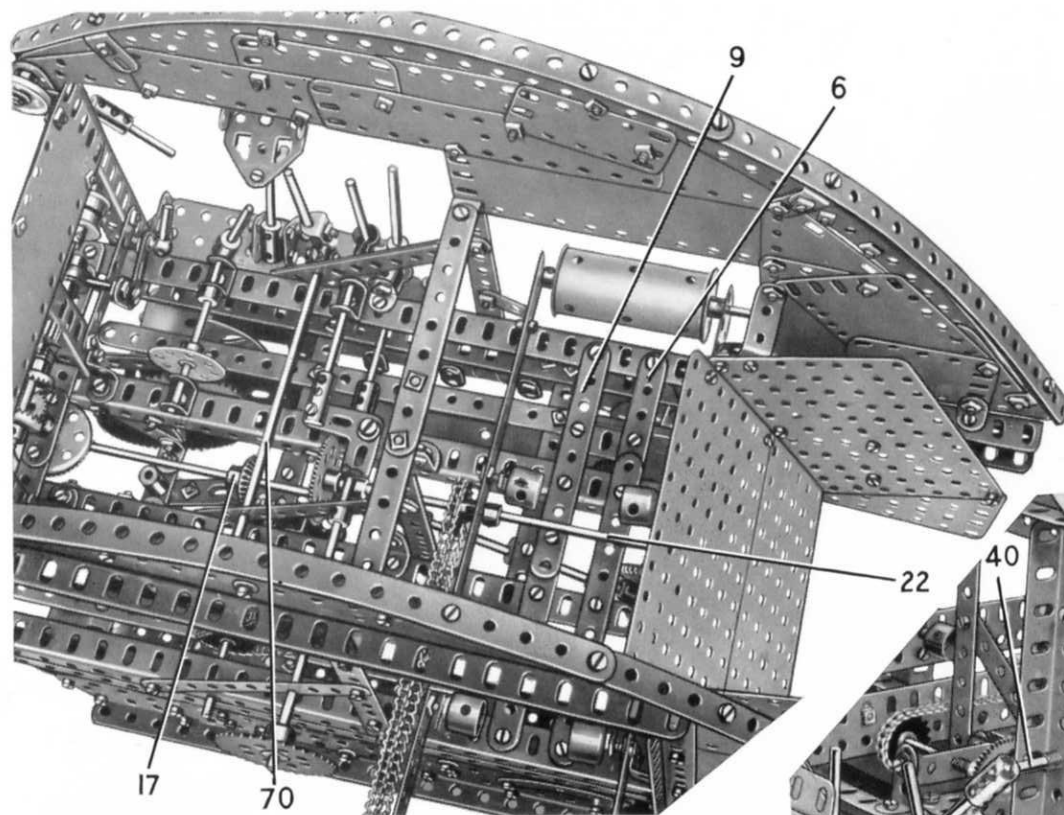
Plan view of the Trench Digger with the boom and bucket chain removed
